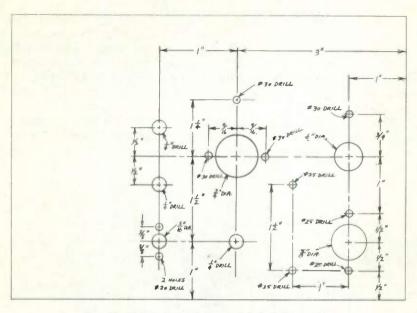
Chassis cover layout and hole-drilling guide.
